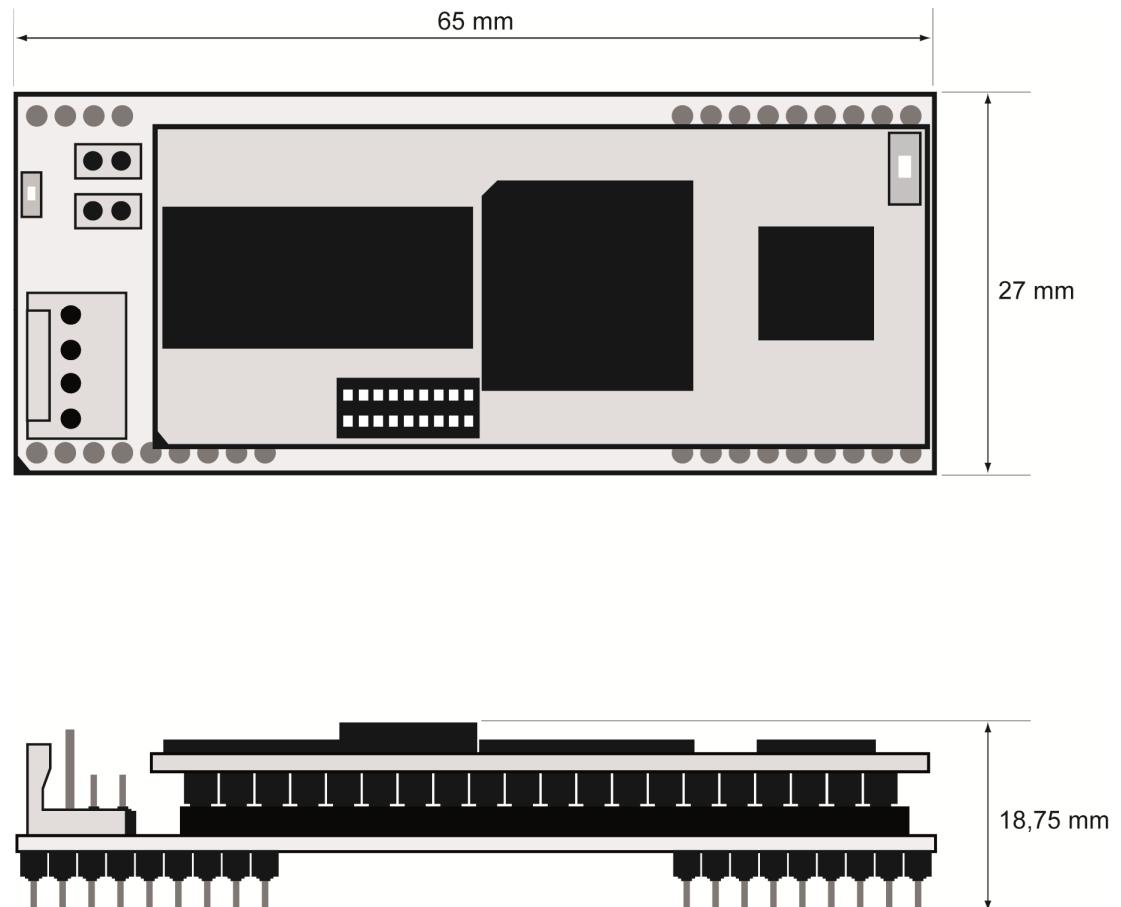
Mechanical dimensions of DIL/NetPC DNP/9265-SMOE
